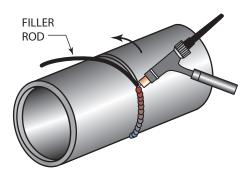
Filler rod curved to surface of pipe for ease in welding.
